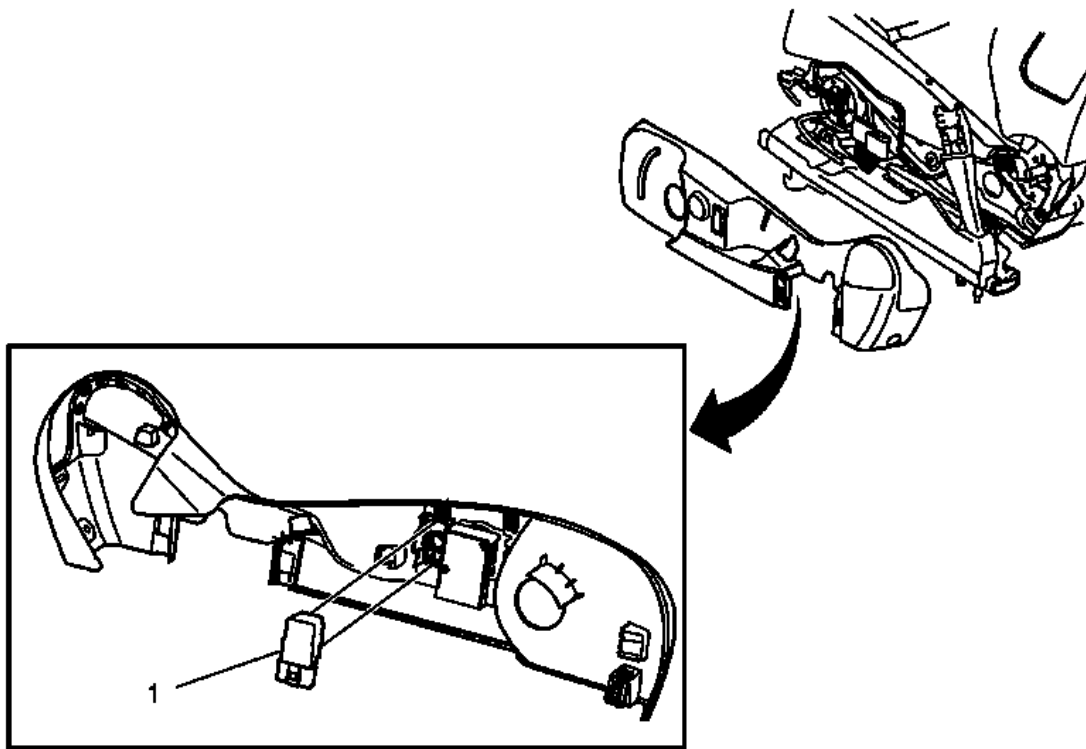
Driver Or Passenger Seat Adjuster Switch
